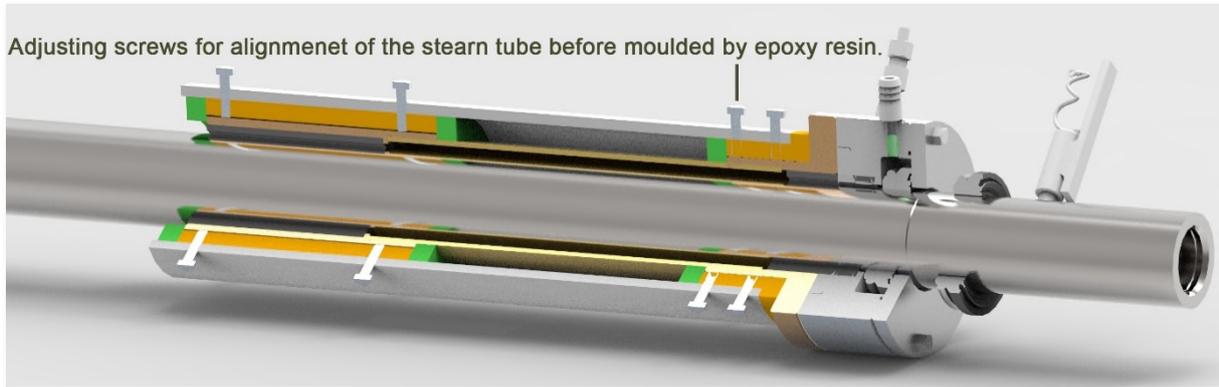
Complete stern tube with outer and inner shaft bearing with shaft seal. An inner tube connects the outer and inner bearing.
